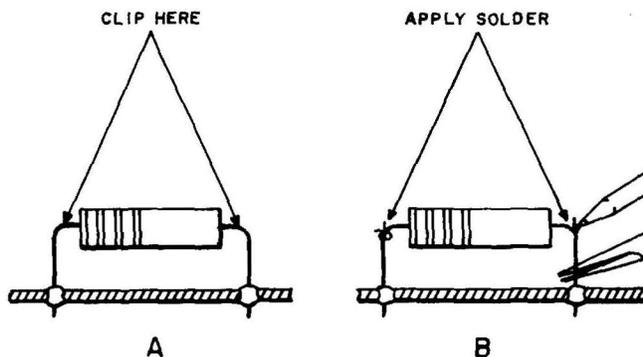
Servicing Etched Circuit Boards—Alternate Method
